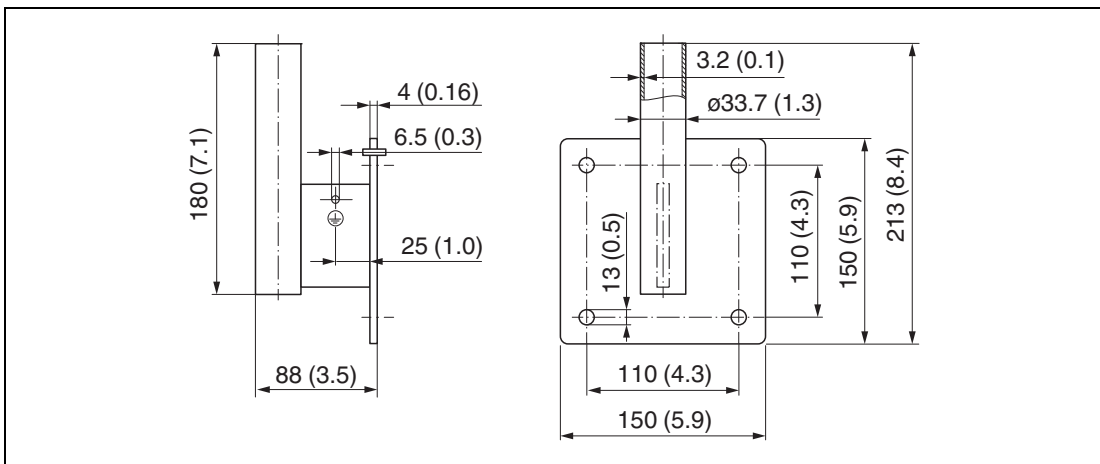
Dimensions of wall bracket, engineering unit: mm (inch)
